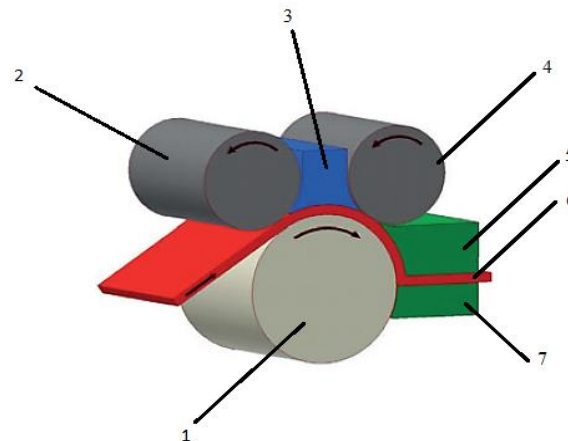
Schema of the DRECE method (1-feed roller, 2-rear pressure roller, 3 guide intermediate member, 4-front pressure roller, 5-upper tool holder, 6-formed material, 7-lower tool holder) [4]
